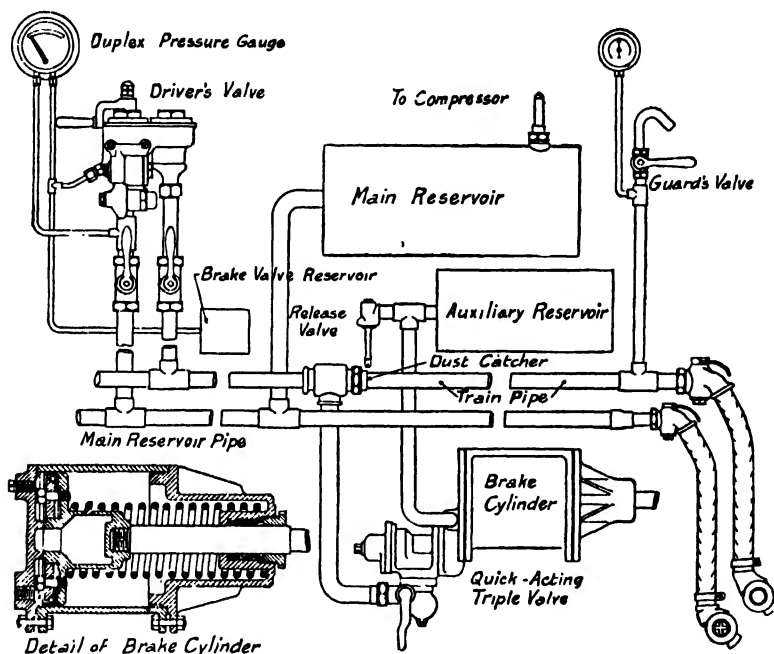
General arrangement of essential parts of Westinghouse Quick-acting Compressed-air Brake (Westinghouse Brake Co.).
